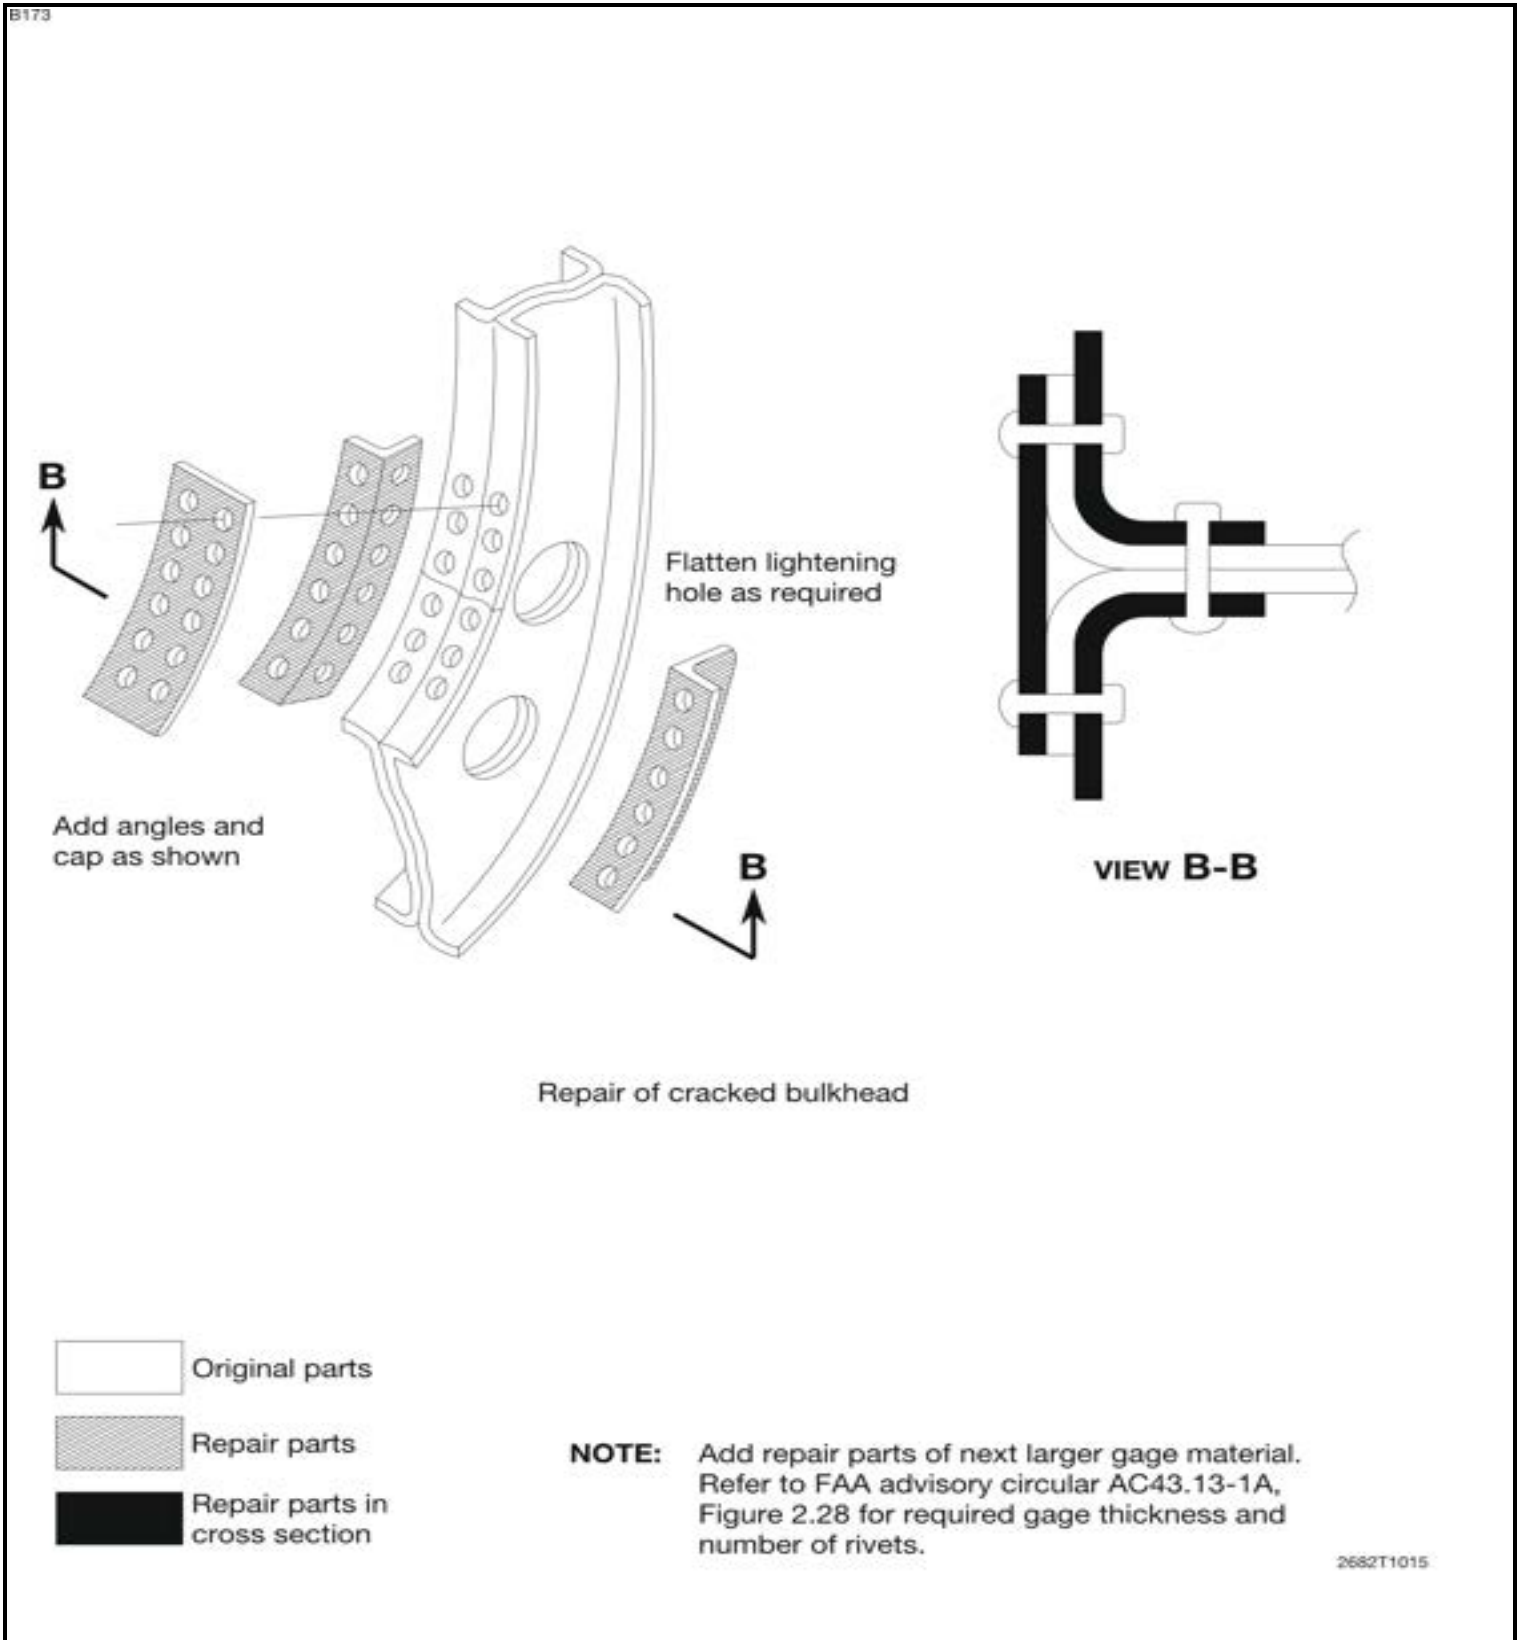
Sheet 3 : Typical Cabin Bulkhead Repair
